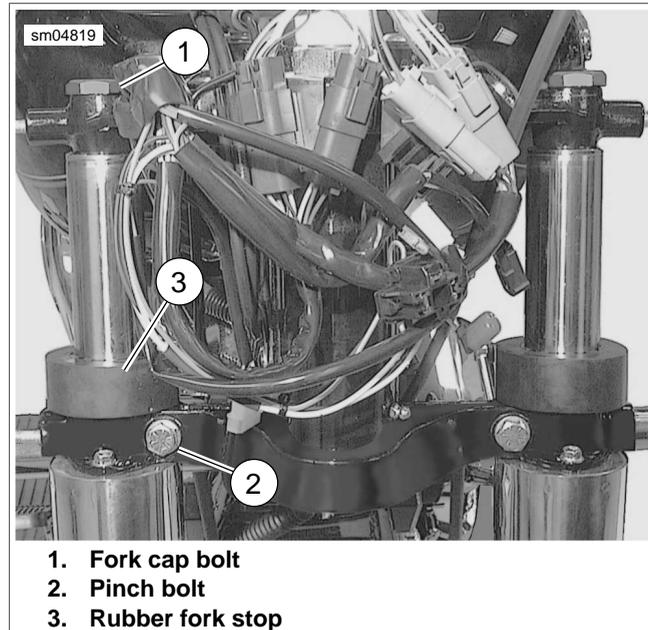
Remove Fork Cap Bolt (FLHR/C Shown)
